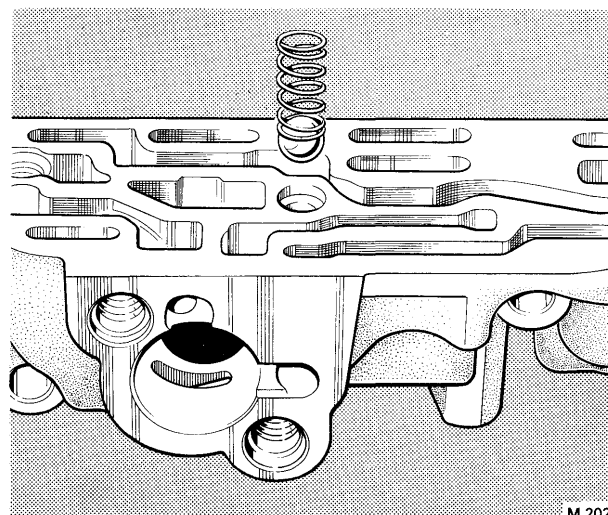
POSITIONING THE OIL CHECK BALL VALVE
